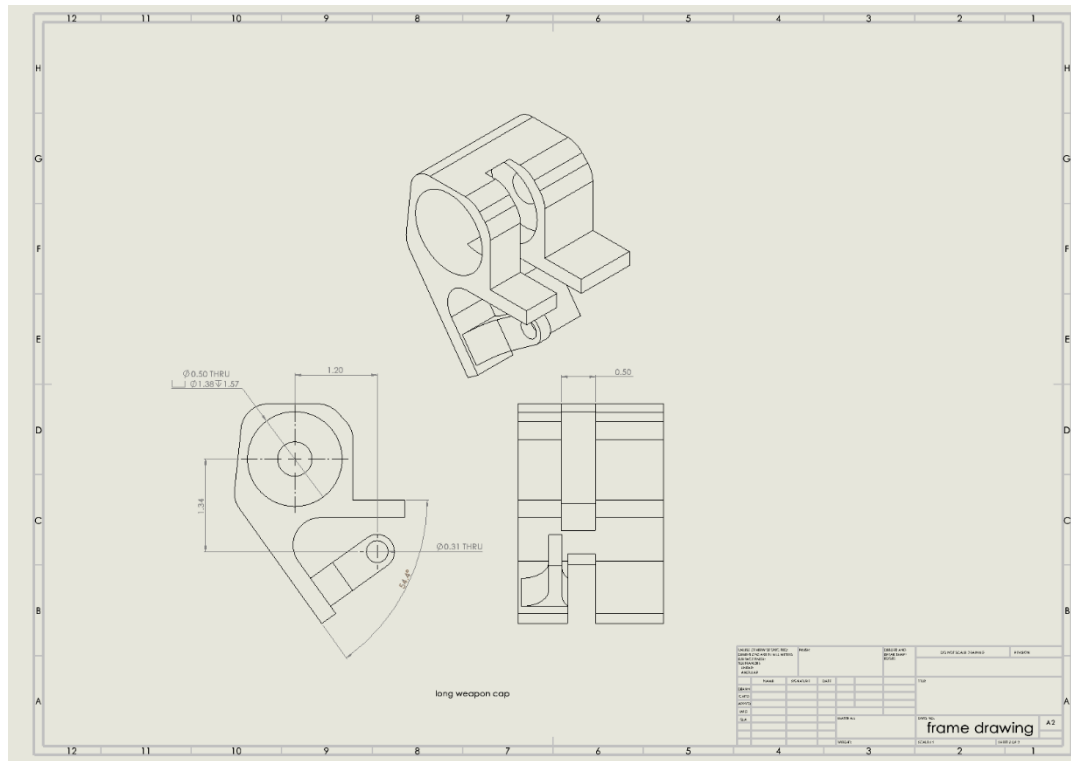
"Long Weapon Cap" Manufacturing Drawing #3
